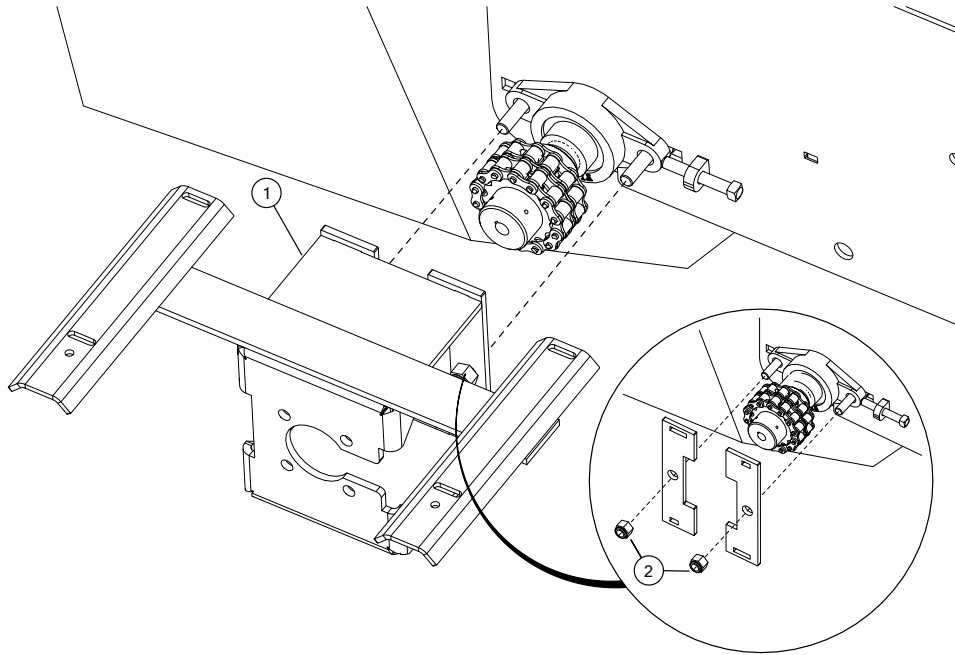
Step 1: Install the Sprockets, Keys, and Chain Couplers
